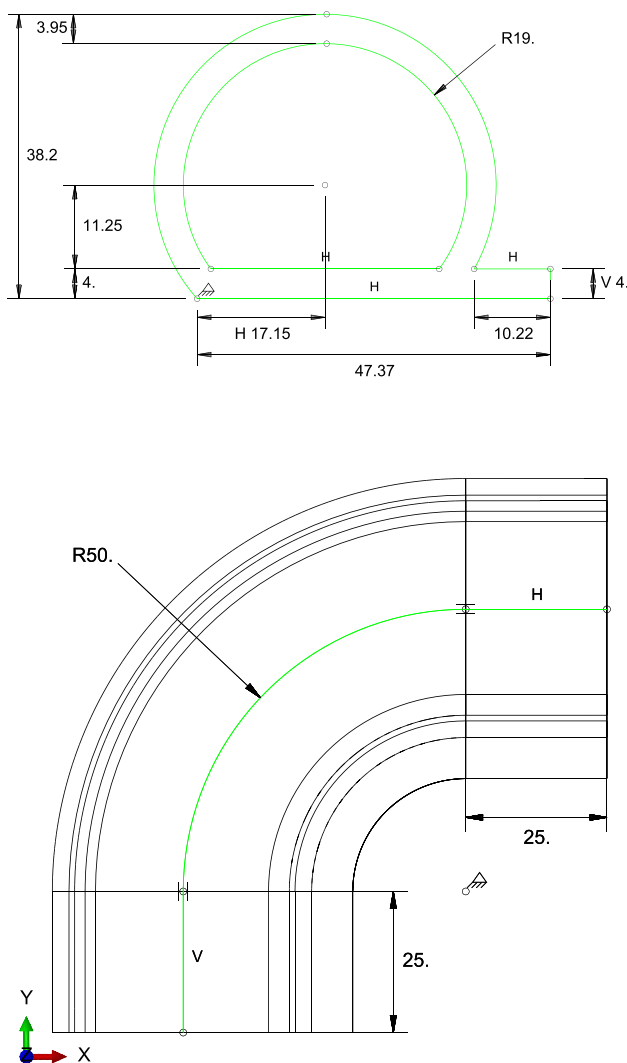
Sweep cross section dimensions in millimeters (mm)
